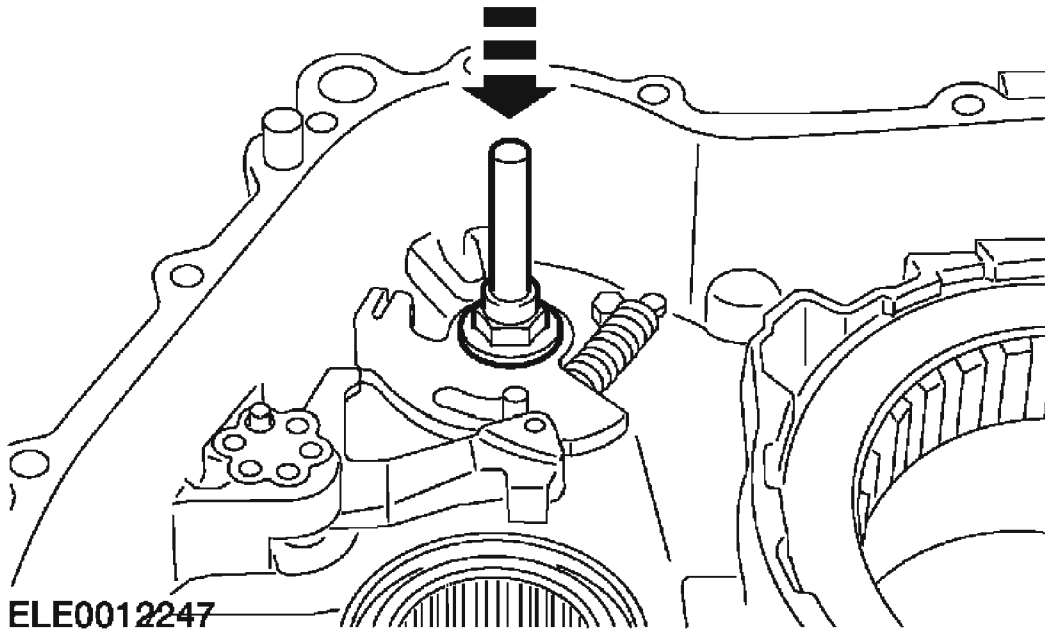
Installing Parking Pawl Shaft Retainer And Bolt
